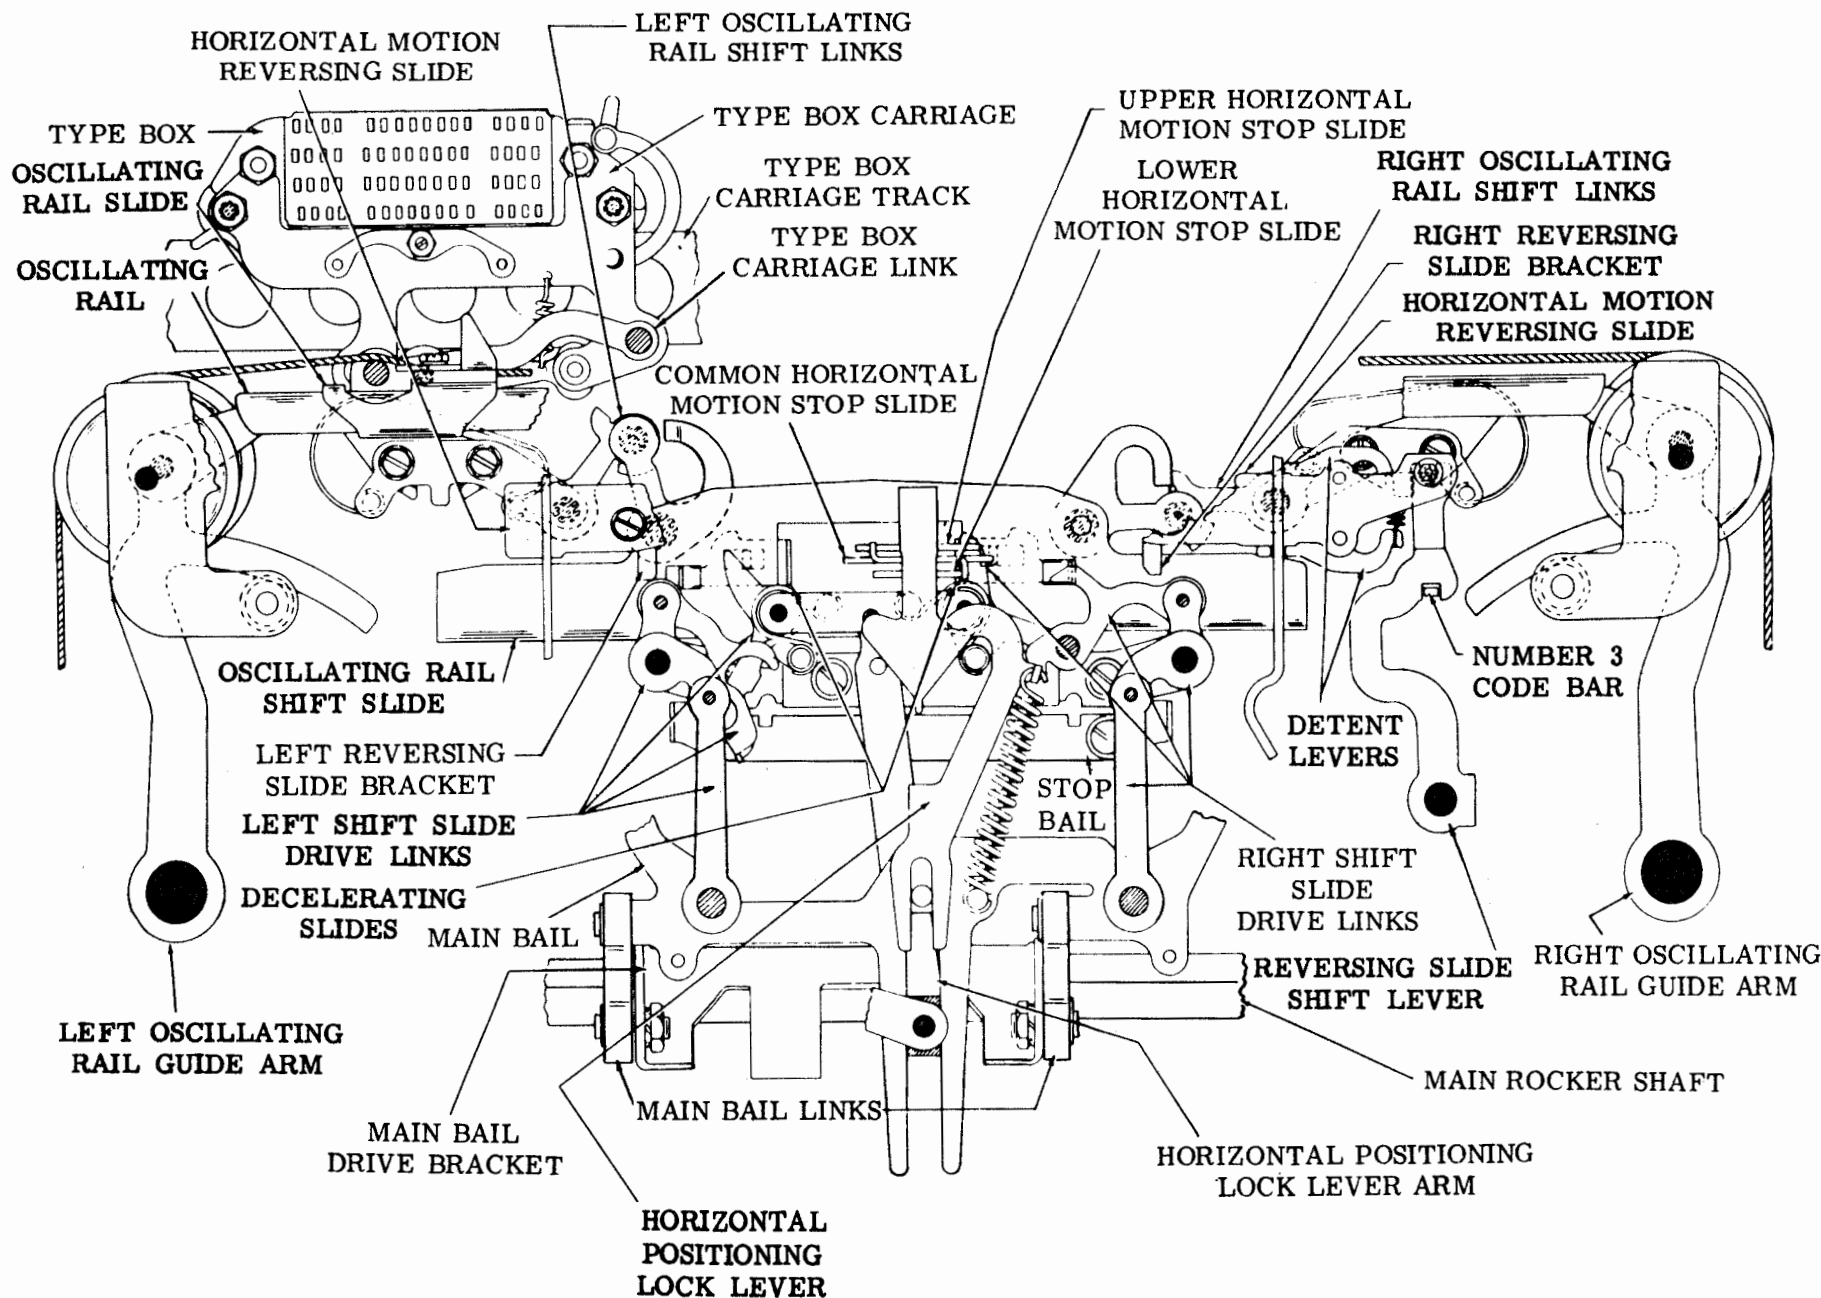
Horizontal Positioning Mechanism (Front View)
